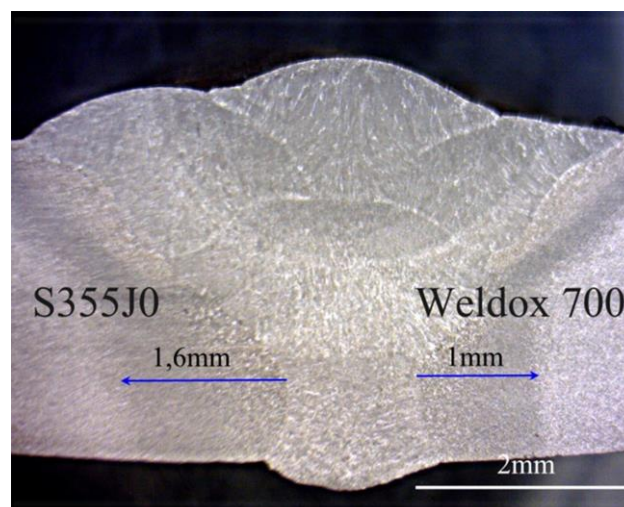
Joint welded using wire electrode OK Autrod 12.51 – five weld beads
